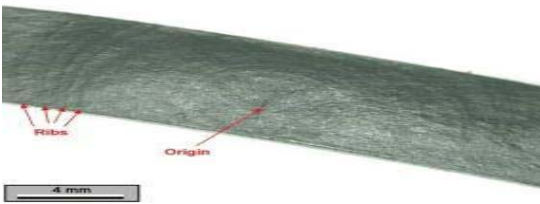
Explosive decompression fracture of rubber O-ring, characterized by fish-eye-like patterns. [2]
